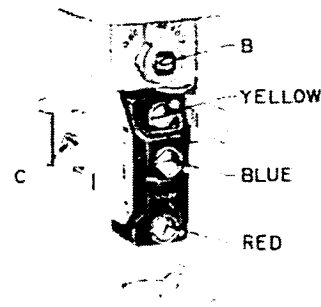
Note color coded contact unit. Mounting strap is held to control by screw "C". See Fig. 5 for mounting instructions.
